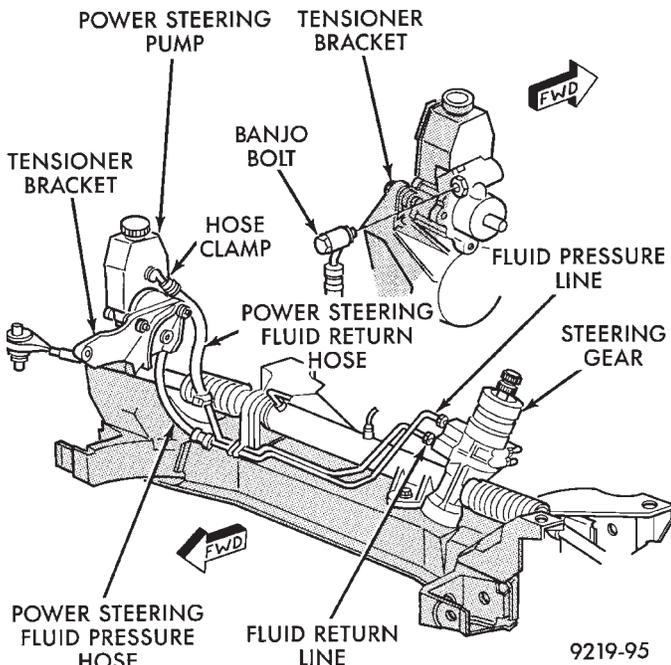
Power Steering Hose Routing 2.2 & 2.5L
